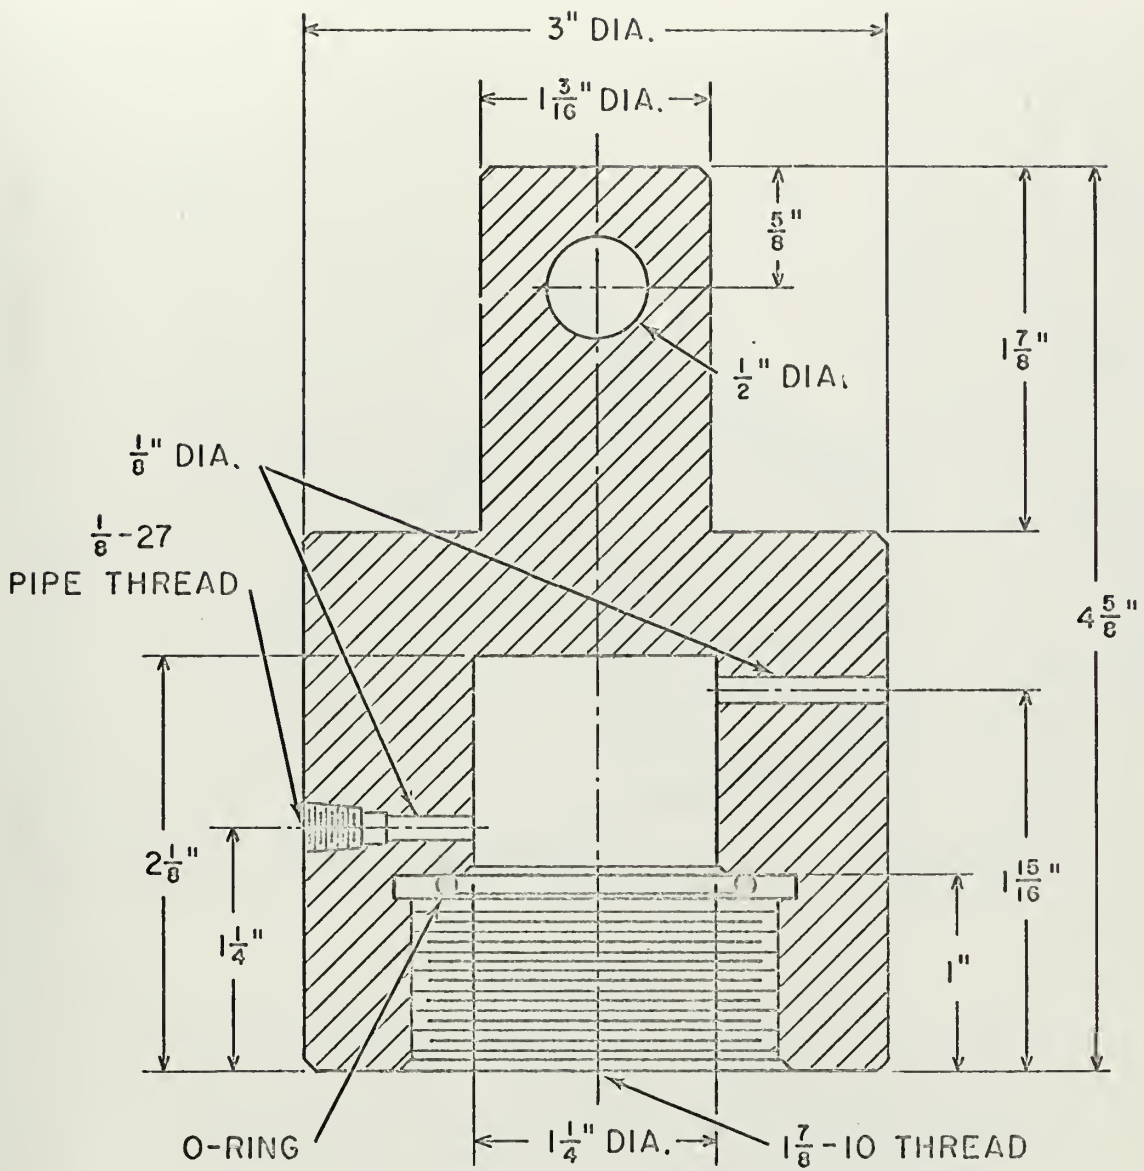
INSTRON UPPER GRIP CROSS SECTION.
